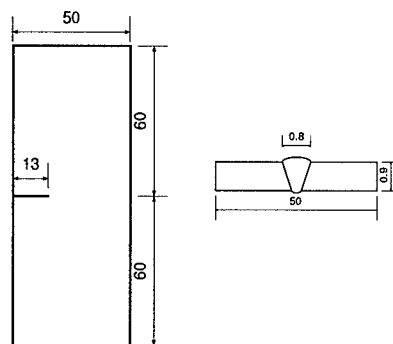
Dimension of specimen for fatigue crack propagation test
